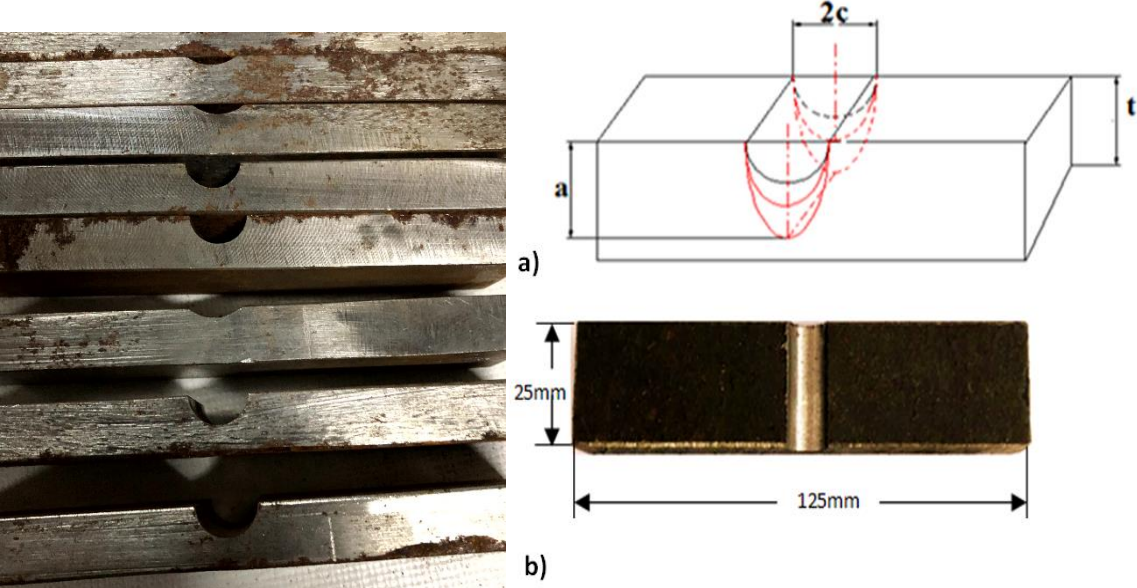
a) Geometry standard of semi-elliptical defects, b) Dimension of the test specimen.
